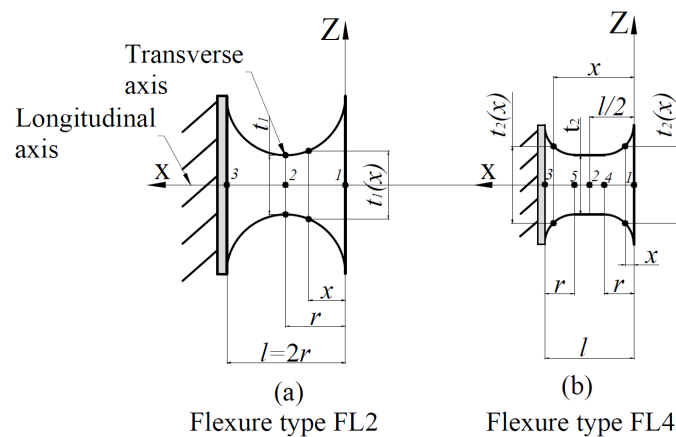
Flexure design: (a) Flexure type 2; (b) Flexure type 4
